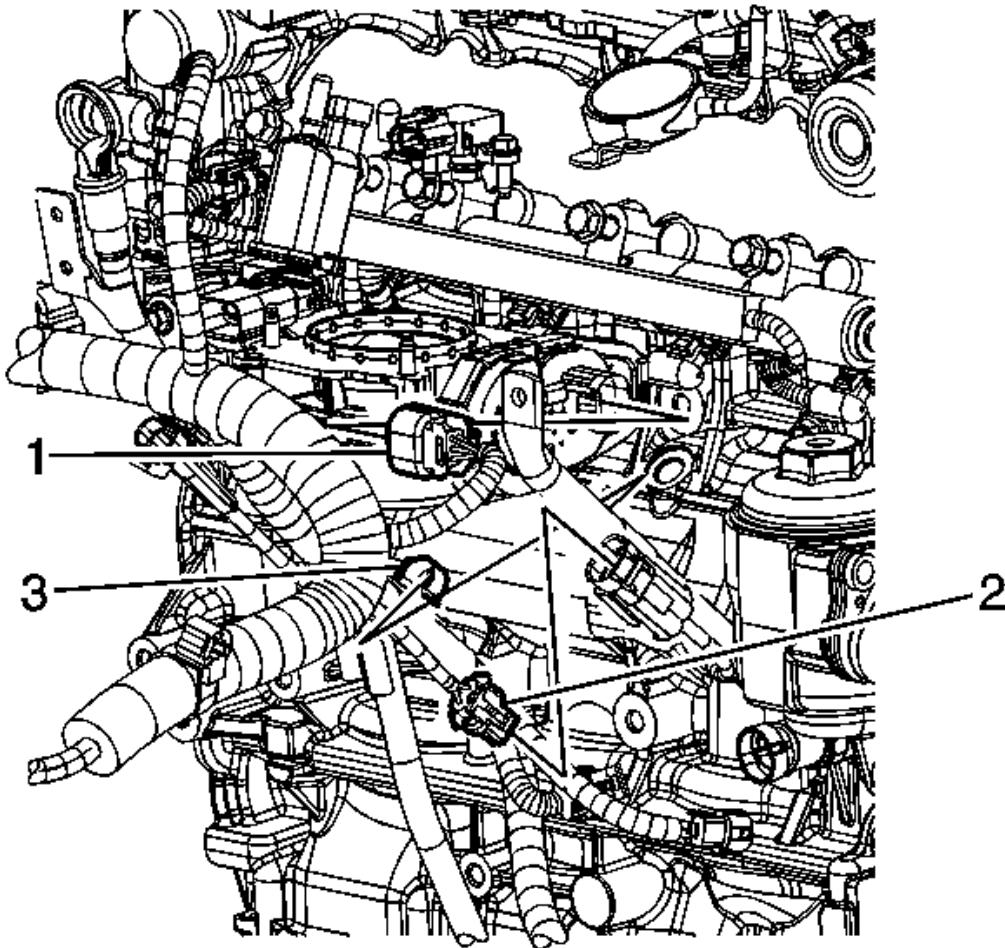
Identifying Throttle Actuator & Knock Sensor Electrical Connectors & Harness Clip
